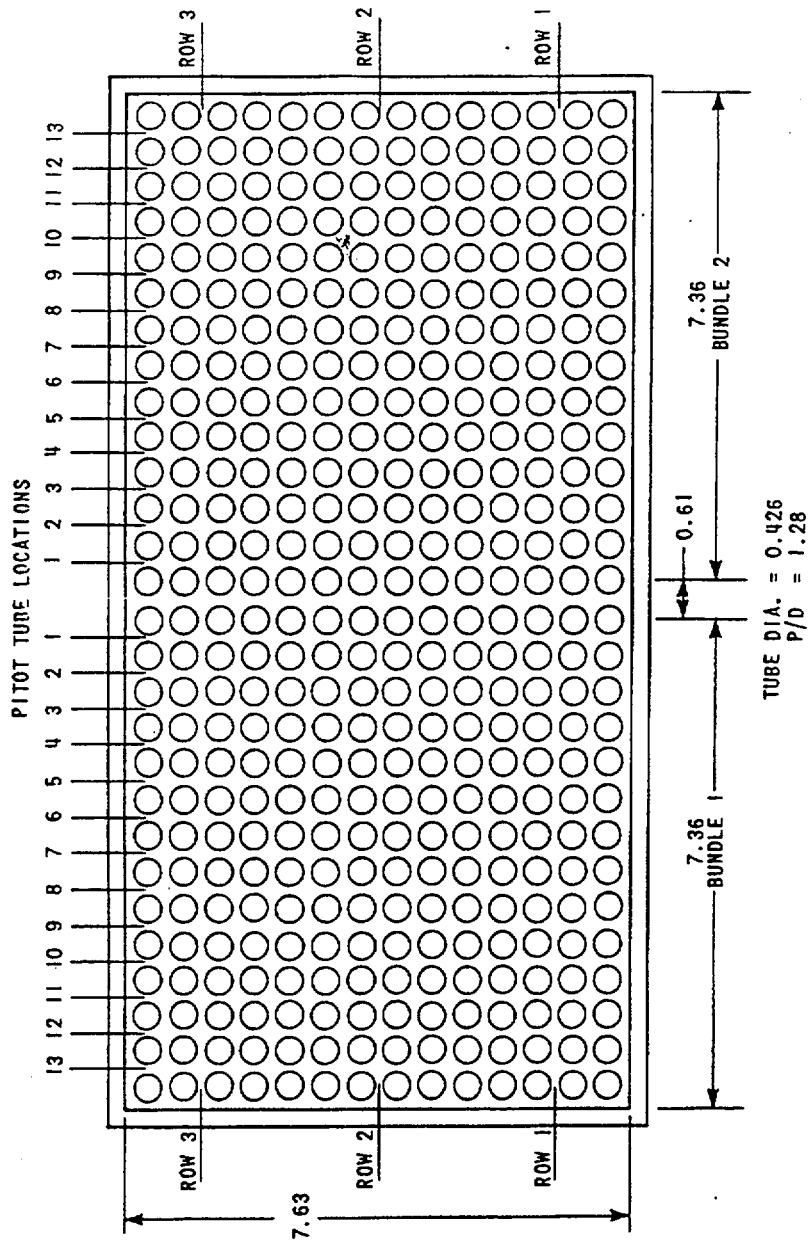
Cross Sectional View of Test Assemblies Without Perforated Plate Between Test Assemblies
